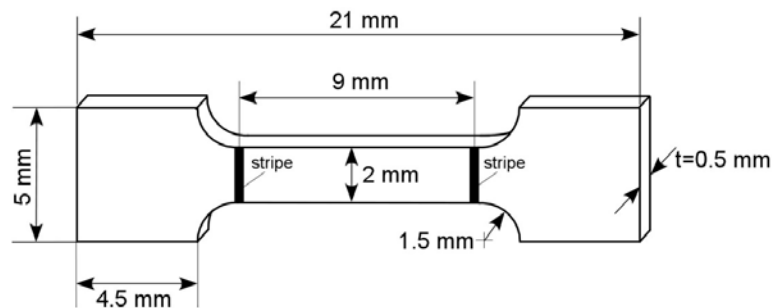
Specimen dimensions and TiO₂ Stripe for displacement measurement using Laser [1].
